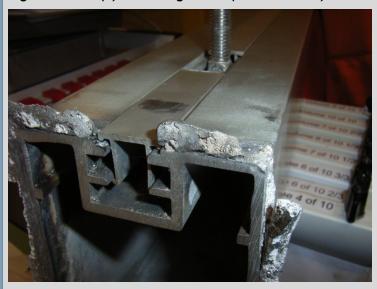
(d) shows the post and the residual weld metal.
